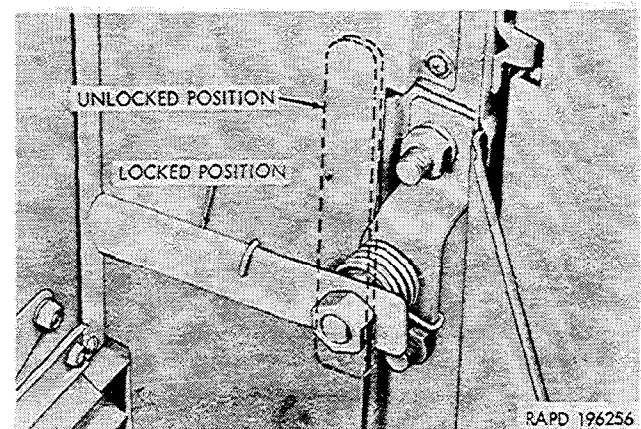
Hinged type spare wheel carrier inside lock lever
